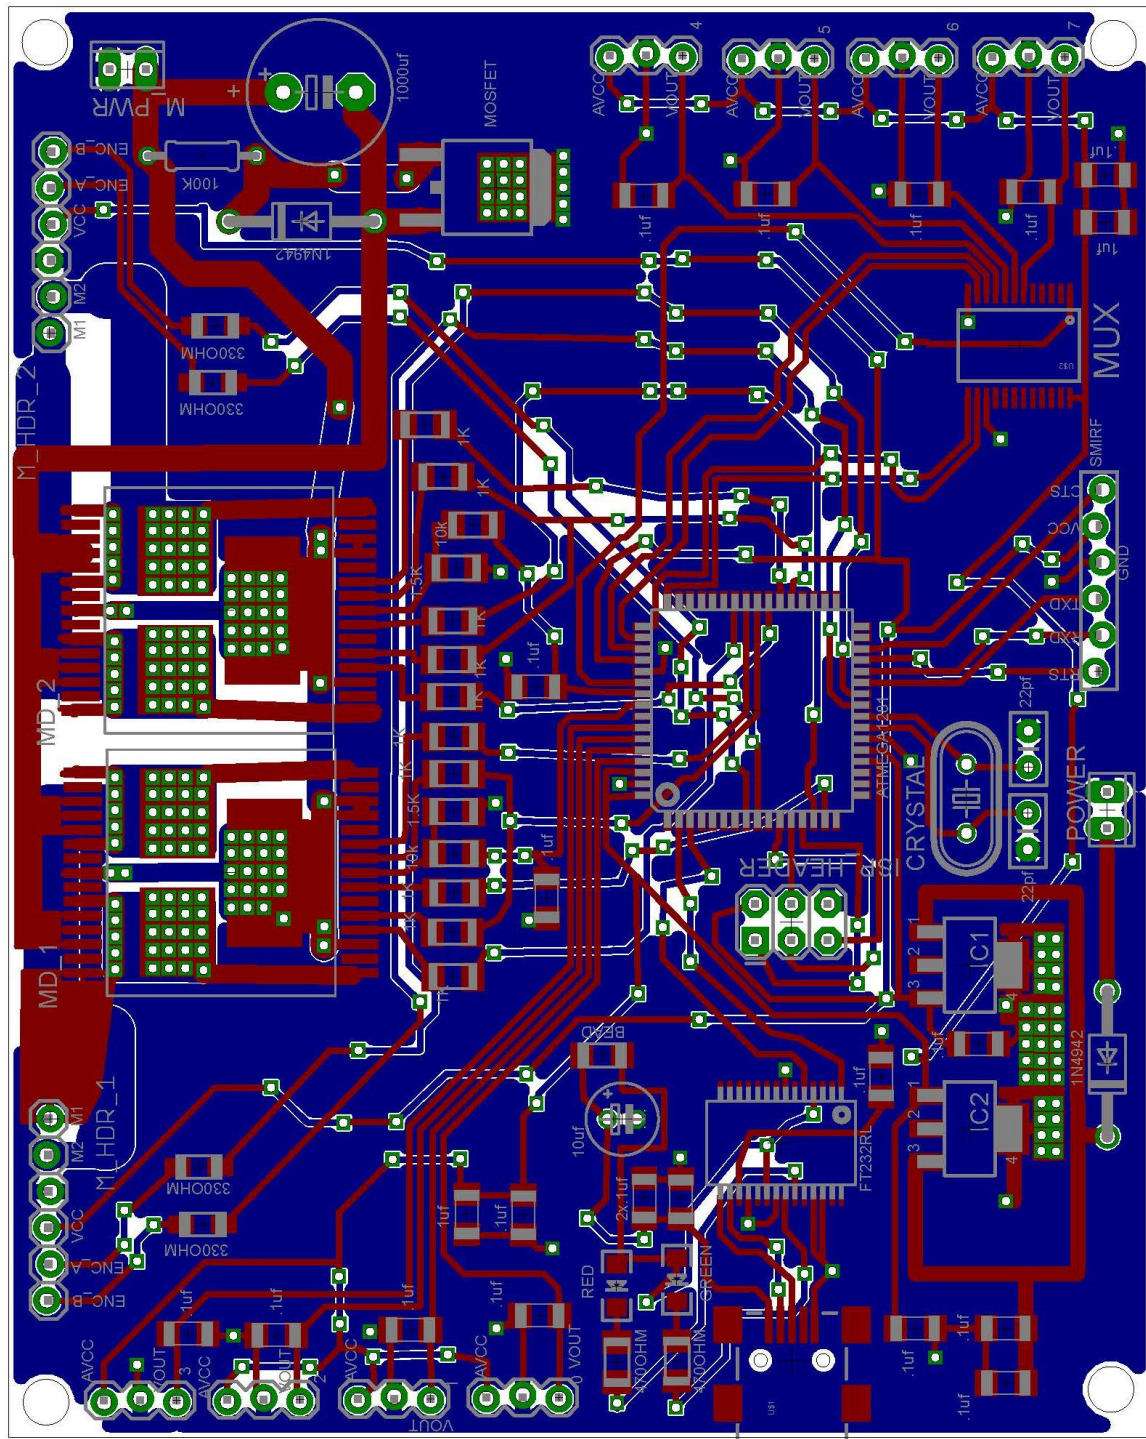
Manufactured circuit board schematic showing overall board layout and complete trace configuration
